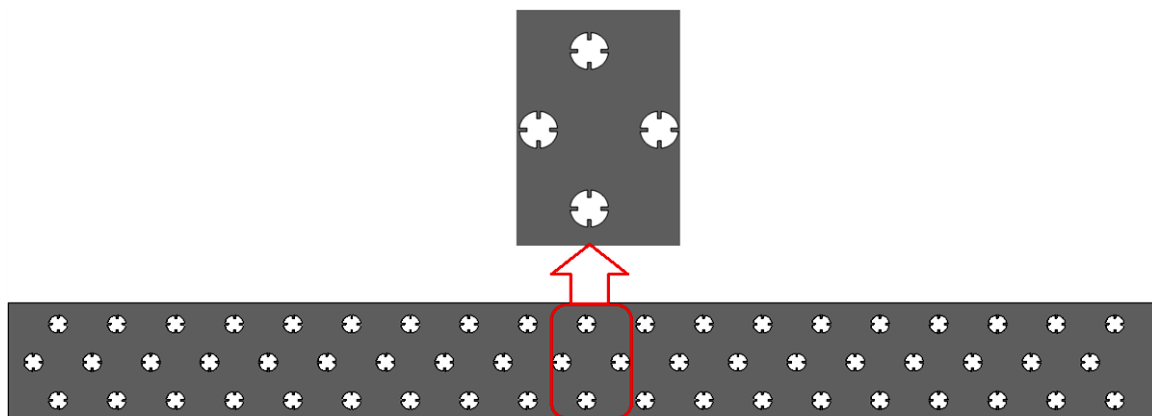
CAD model of Design-4 for a finned tube gas cooler on CO₂
